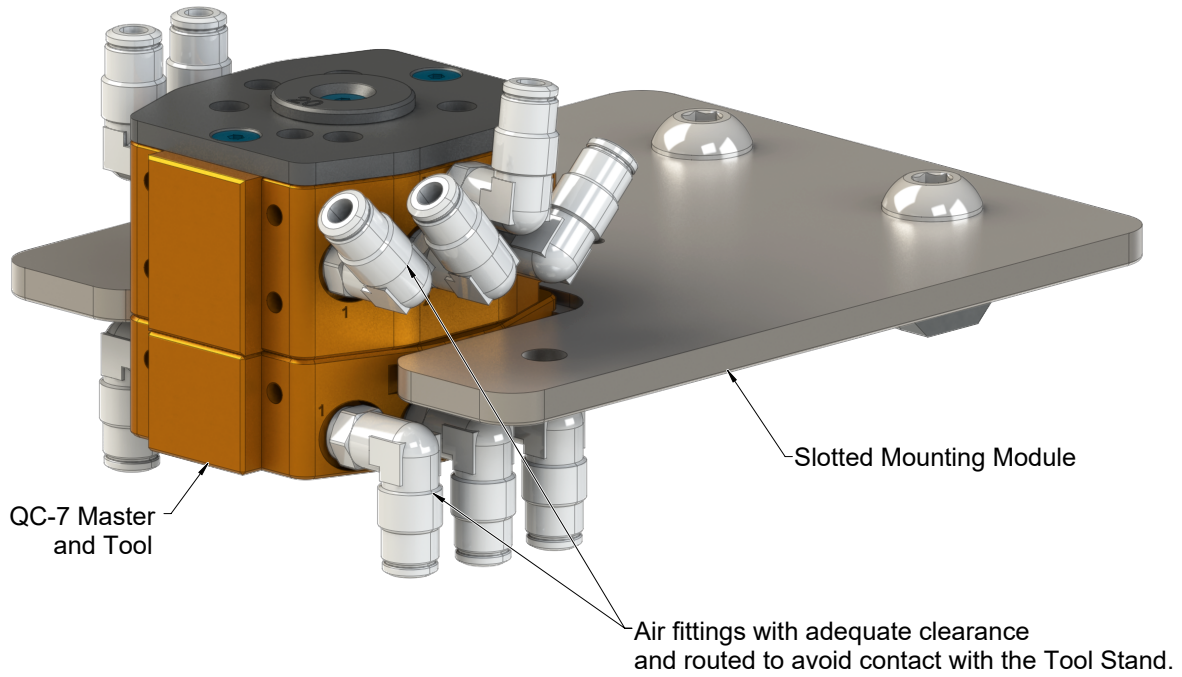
Installing TSS Tool Stands with QC-7 Slotted Mounting Modules
